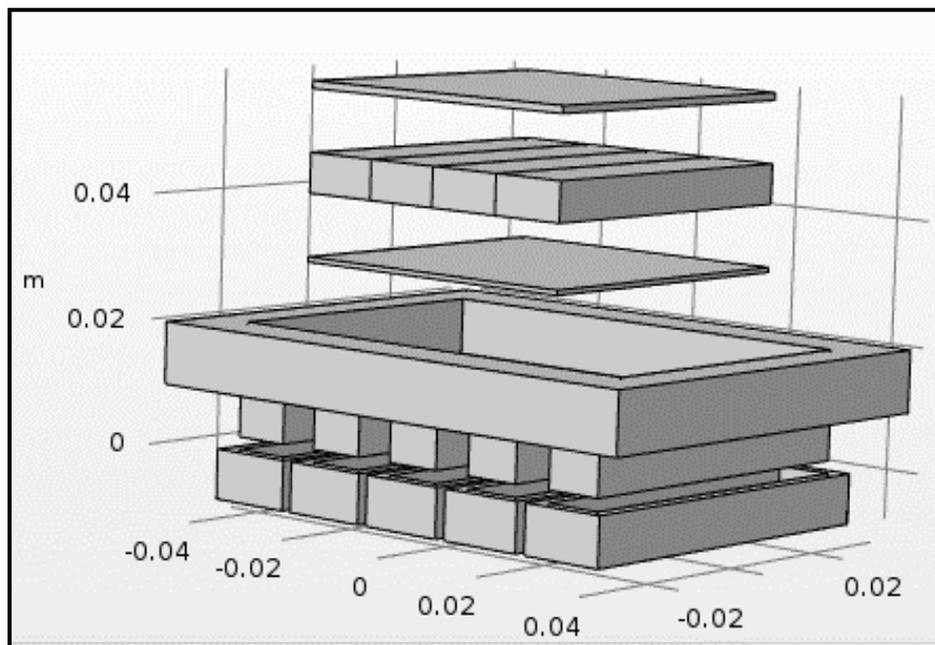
Exploded view of the electromagnetic vibration harvesting device
